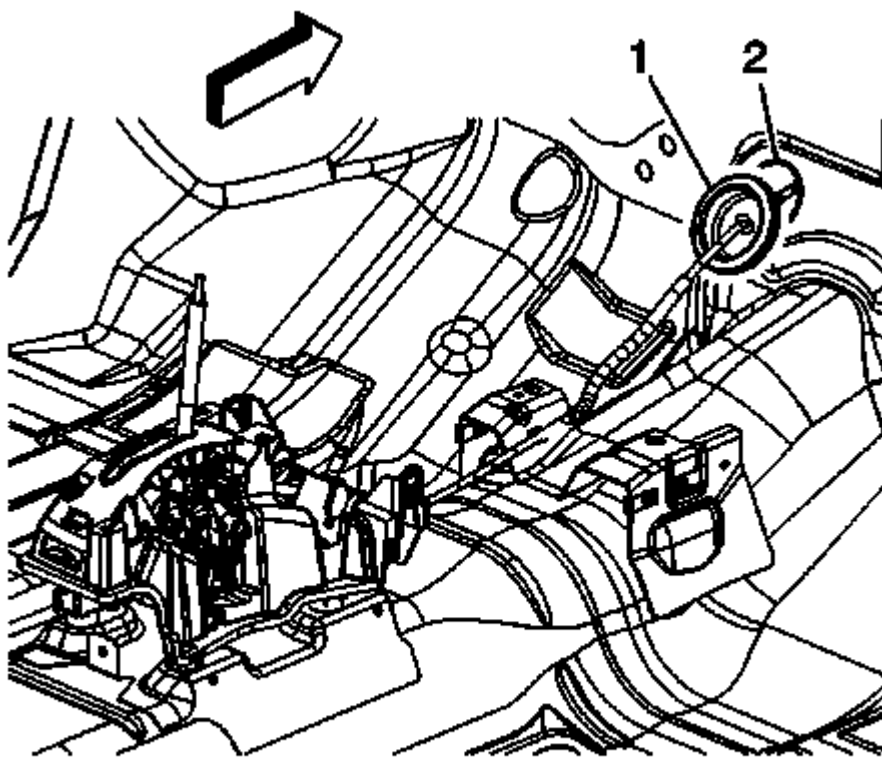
Identifying Cowl Panel & Selector Lever Cable Grommet
